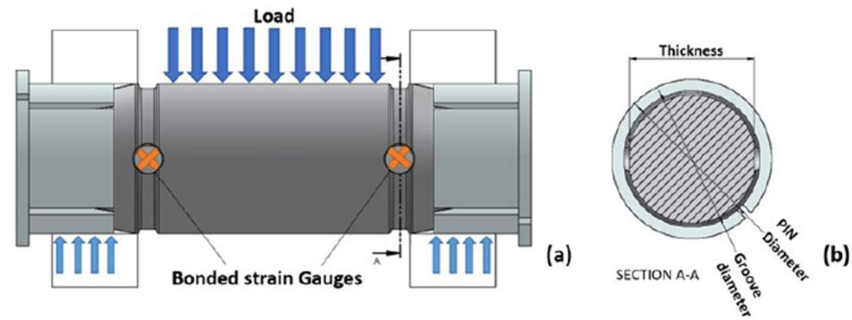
Strain gauges on loaded expanding pin, (a) at 0° position, and (b) cross-sectional area at grooves
